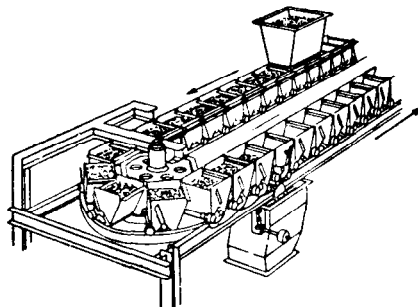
BOTTOM DISCHARGE BUCKET CONVEYOR
